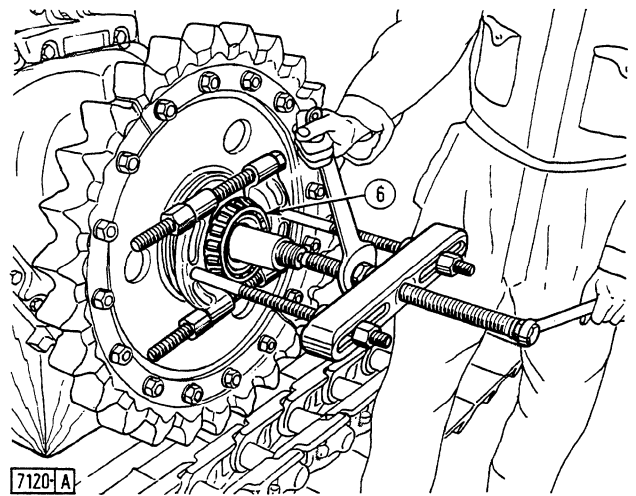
Disassembly of inner of outboard taper roller bearing (6) with special puller.
